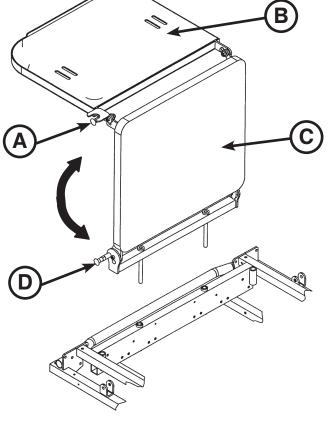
Foot Extension/ Defibrillator Tray - Foot End
